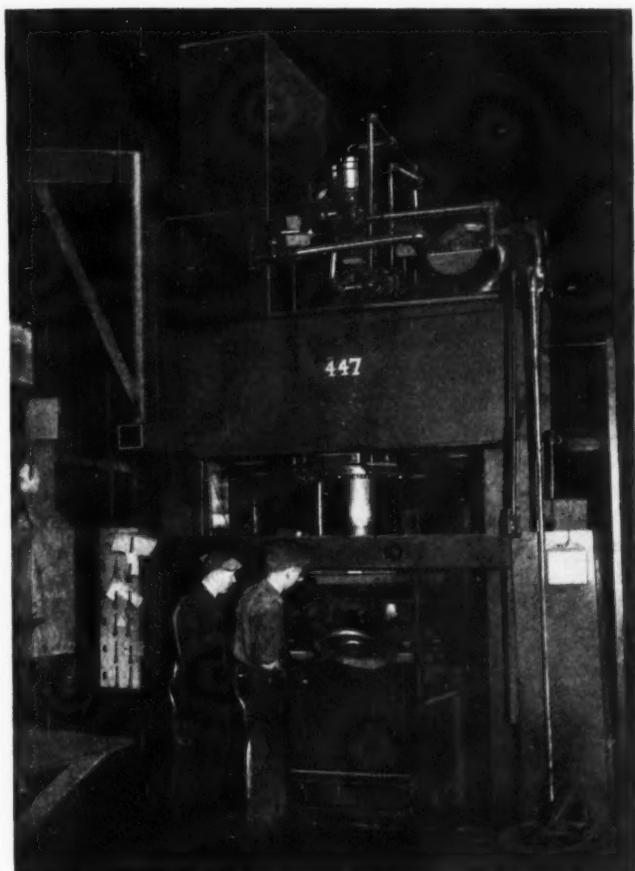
A Hydraulic Press with Piston and Cylinder Made from Plates Rolled and Arc-welded
